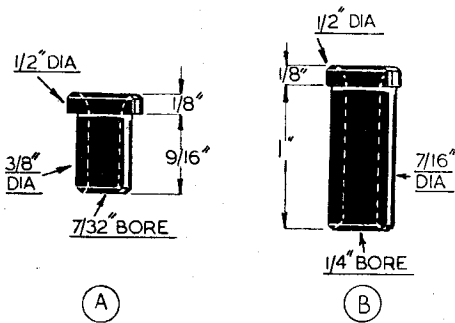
Wiring brushes. (A) for the baseplate; (B) two required for the baseboard
